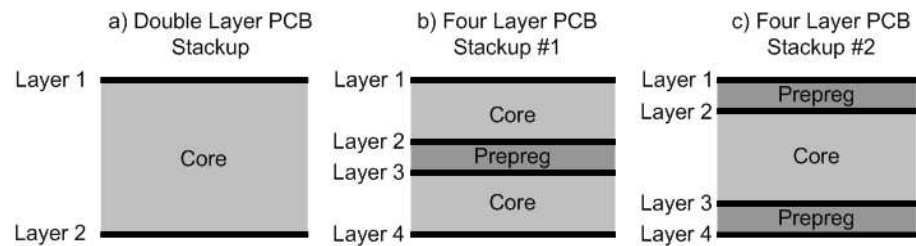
Common PCB stackups. Four layer PCB can be made in two different ways while a double layer PCB can be made only in one way.
